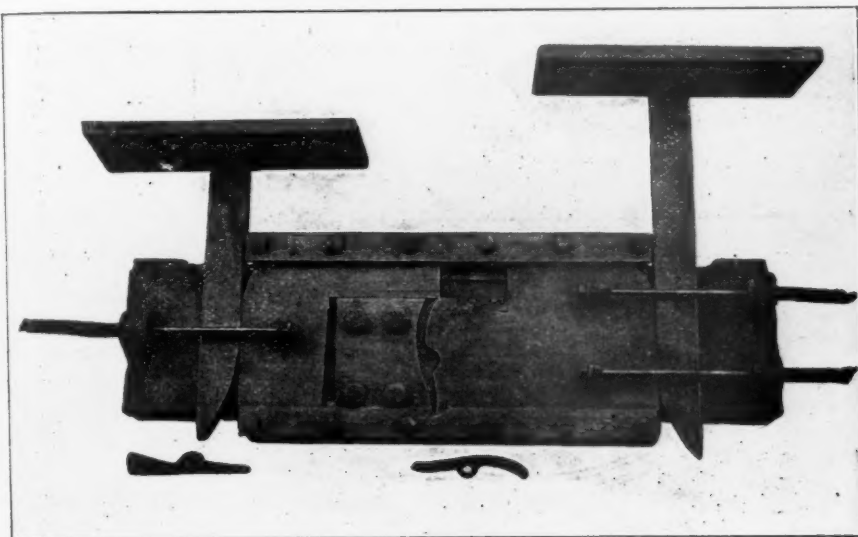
DEVICE FOR BENDING AND PUNCHING STEEL RATCHET PAWLS.
